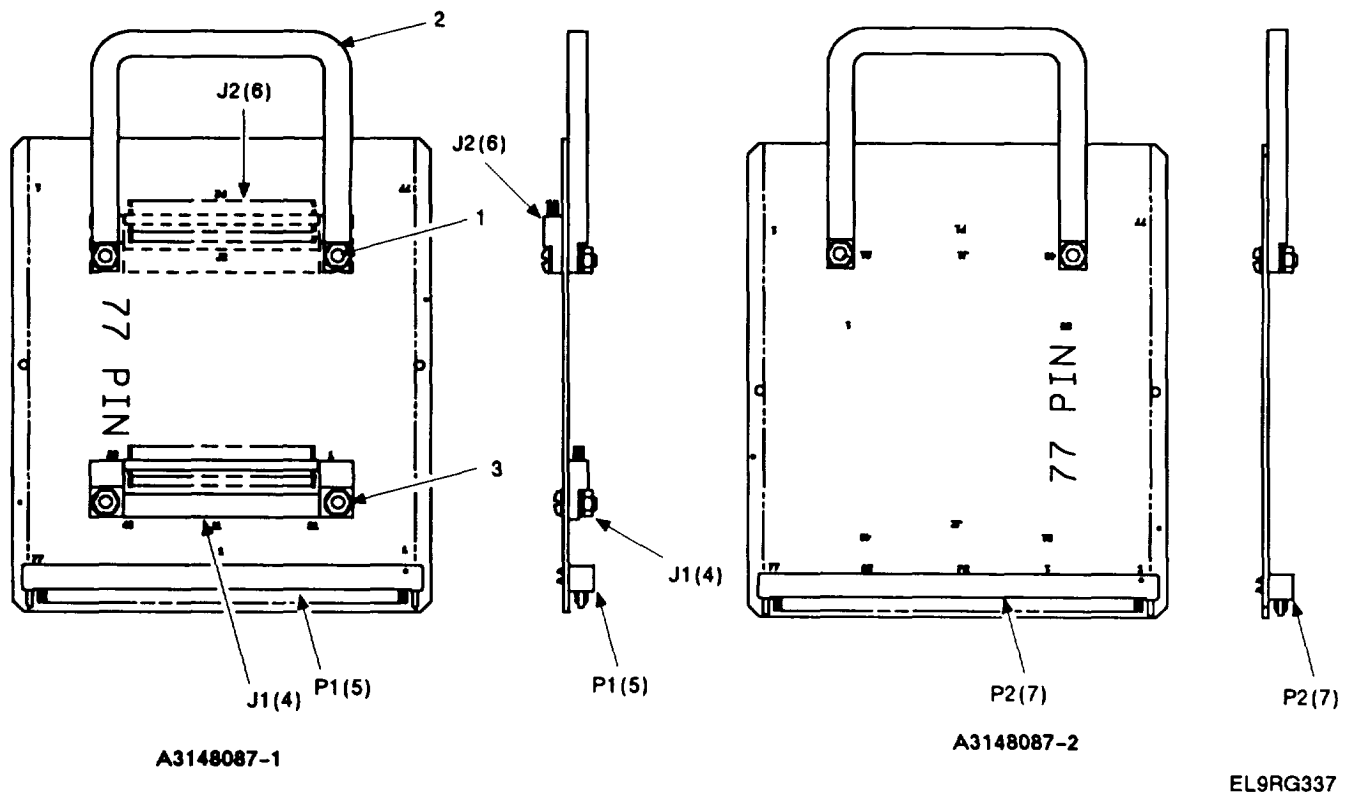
Electronic Test Extender Cards-77 Pin Connector Component Layout
